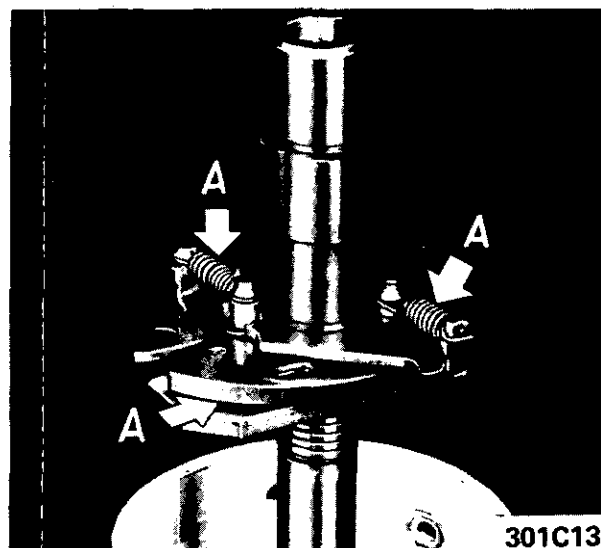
C-13 Lubricating Centrifugal Mechanism Reassembly
